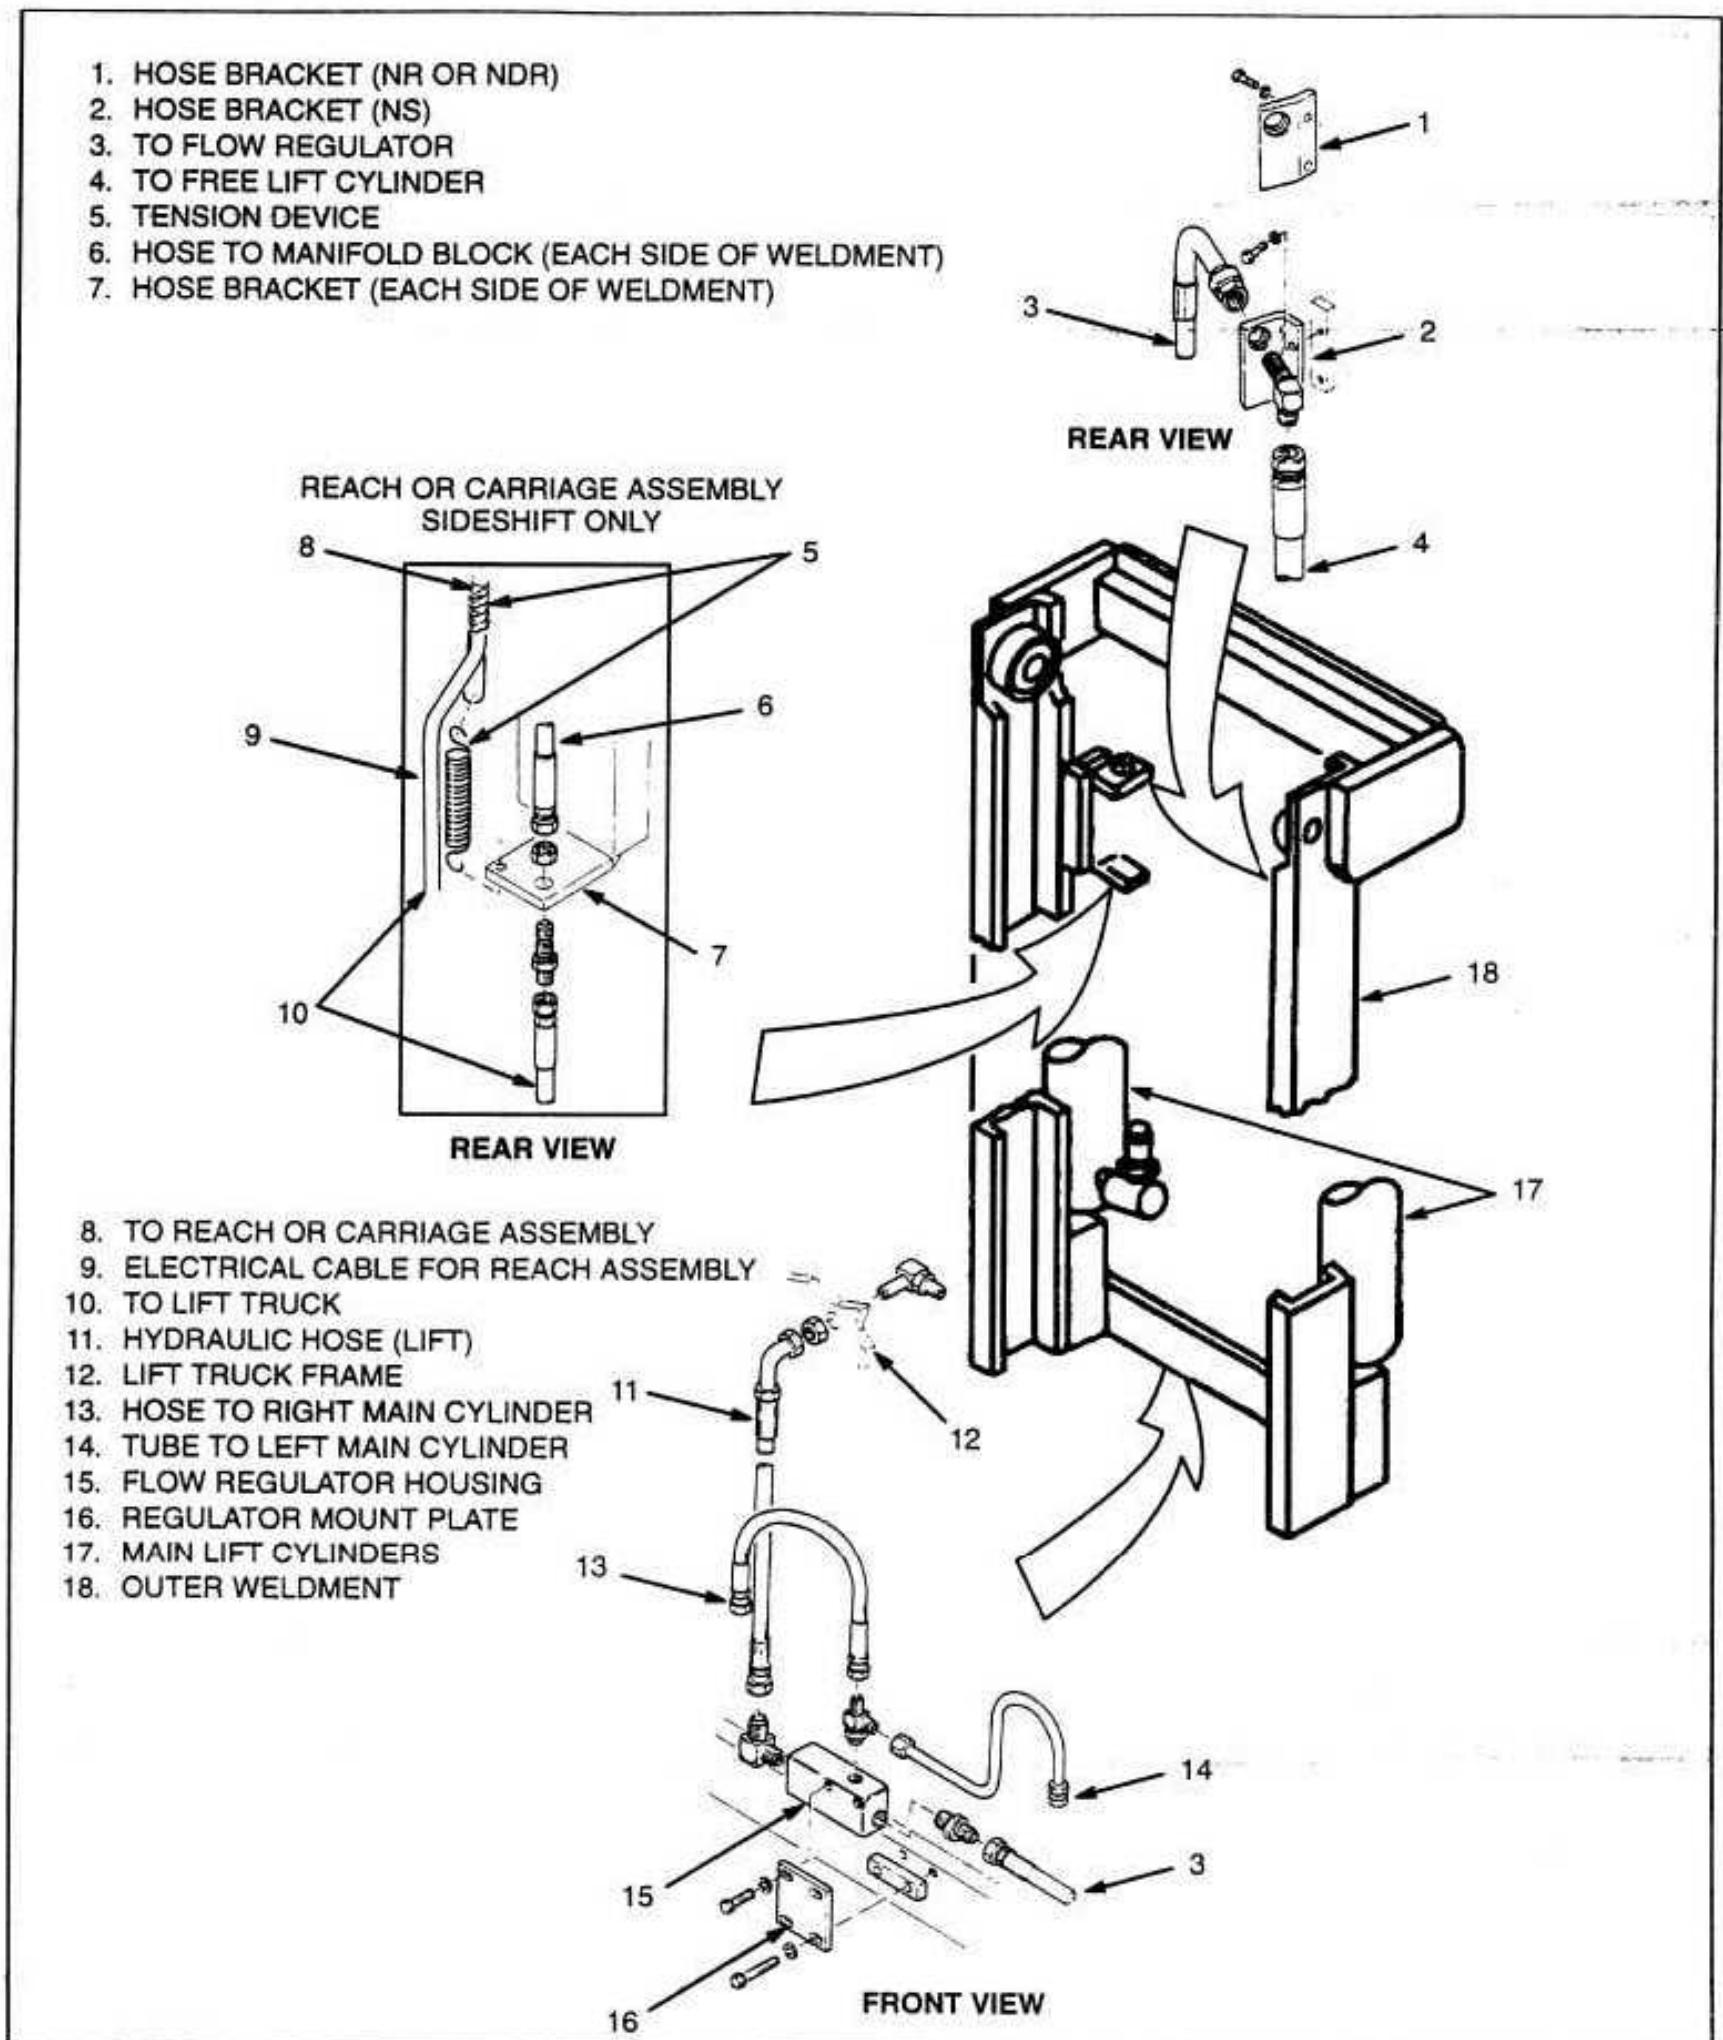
Hose and Cable Assemblies—Outer Weldment
